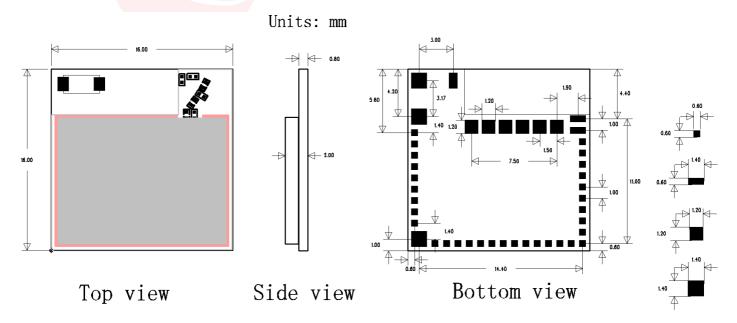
Recommended PCB Footprint of RF-BM-2652RB2
